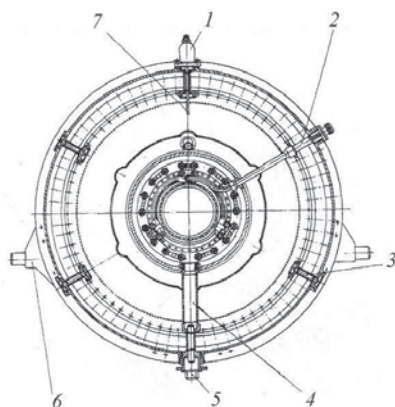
Rear compressor housing of the D050 engine [15]:
